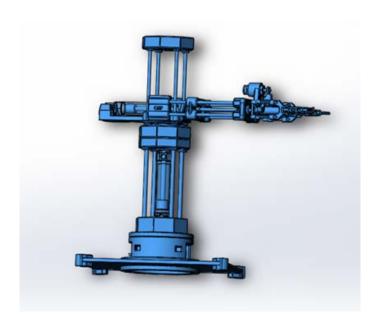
Solidworks diagram of pneumatic mechanical arm
